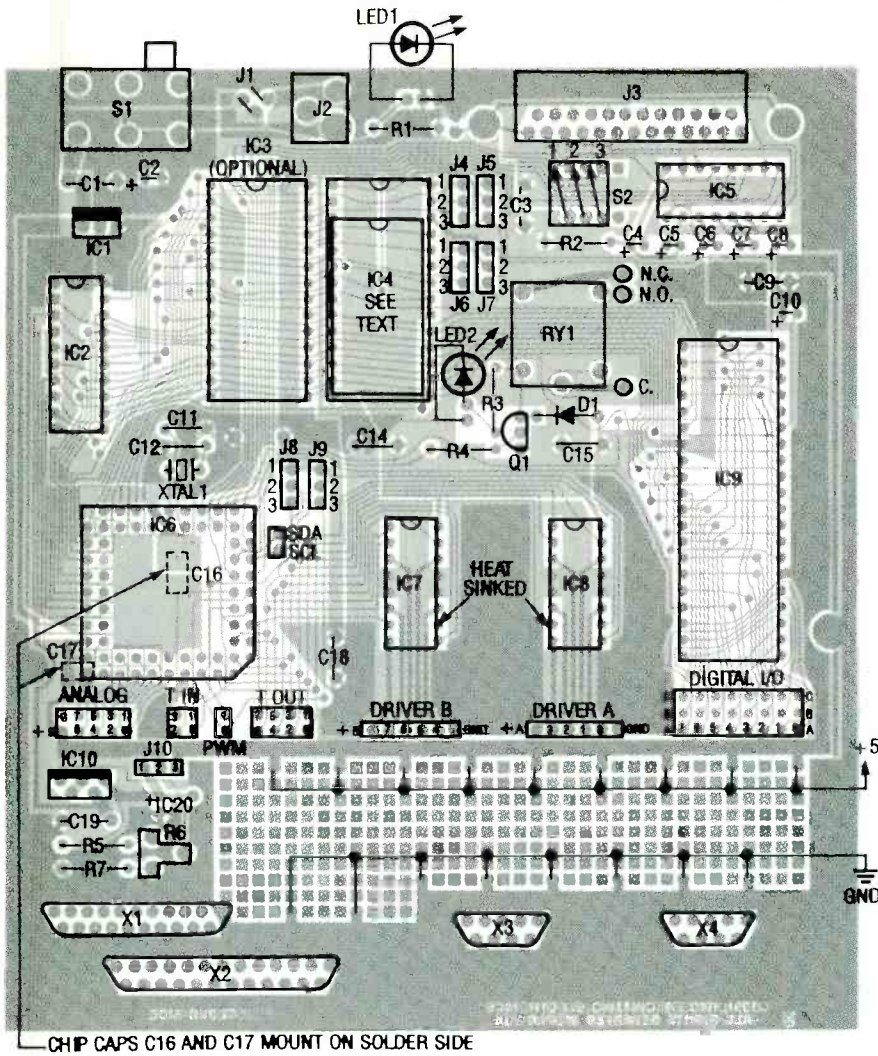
PARTS-PLACEMENT DIAGRAM. Note that two chip capacitors, C16 and C17, mount on the solder side of the board.
